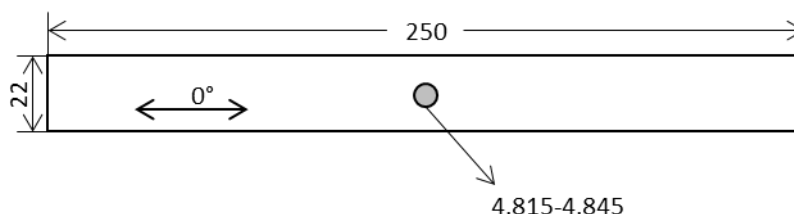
Coupon geometry for tensile test - FHT coupon, according to AITM1-0007. All dimensions are expressed in mm.
